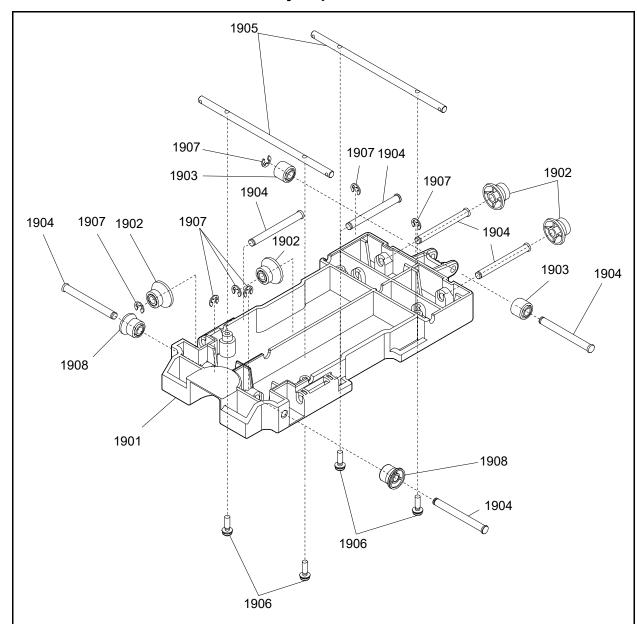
iVIZION HC Receive Plate Assembly Exploded View
